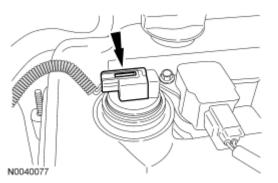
Locating Variable Camshaft Timing (VCT) Solenoid Electrical Connector Courtesy of FORD MOTOR CO.
